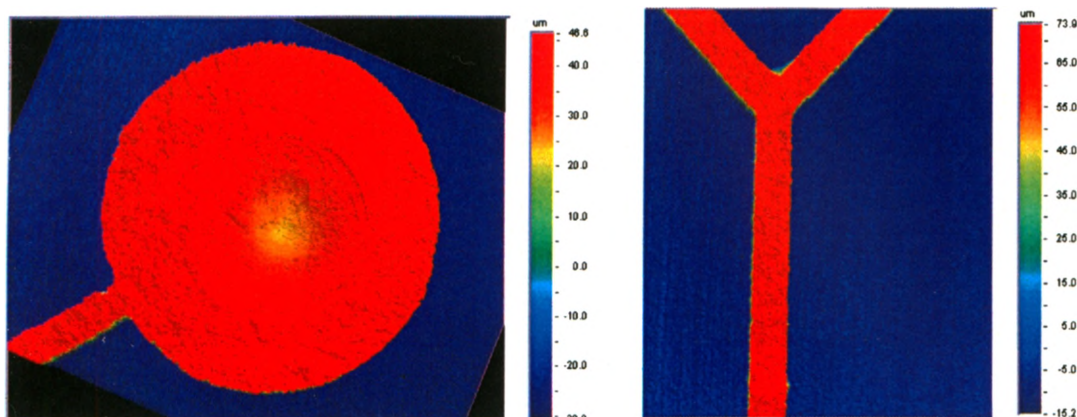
Weld pool at the inlet location (left) and Y-channel mold, positive relief (right), taken by an optical profiler.
